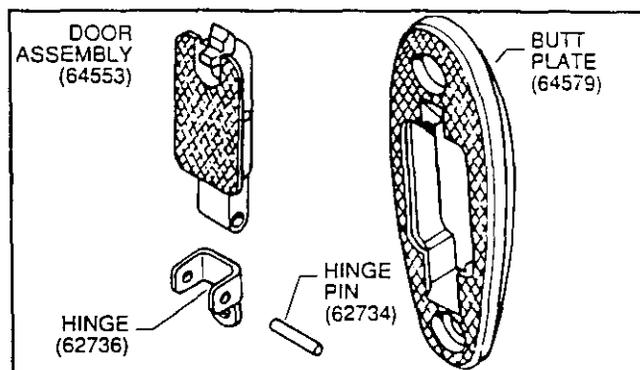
BUTTSTOCK STOWAGE DISASSEMBLY
